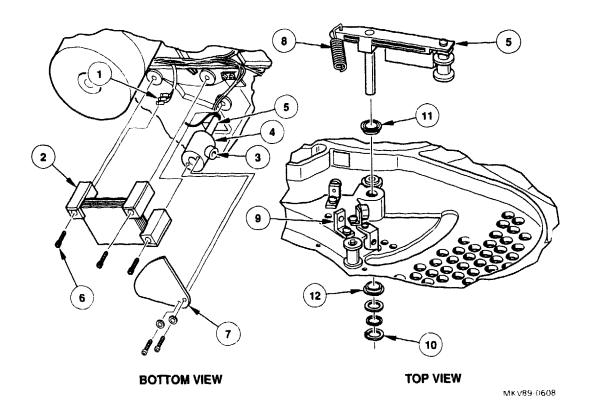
Removing the Tension Arm, Stator, and Rotor
